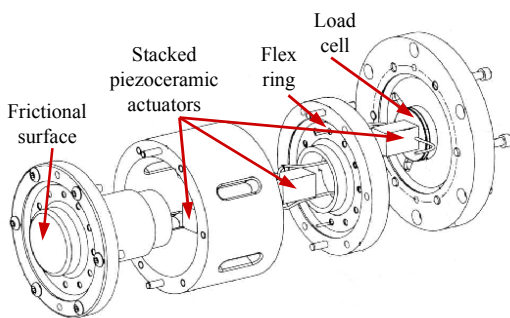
Exploded view of the torsional Smart Spring prototype actuator unit (the “can assembly”).
